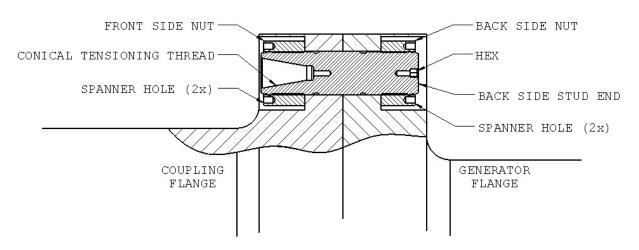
Cutaway View of Generator Flange and Coupling Flange Bolted Joint
